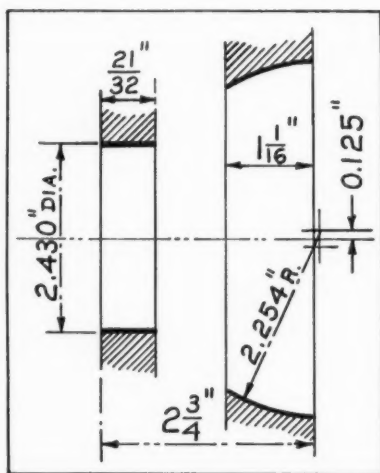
Dimensions of the Spherical Seat and Straight Hole Machined by the Special Tools Here Described
